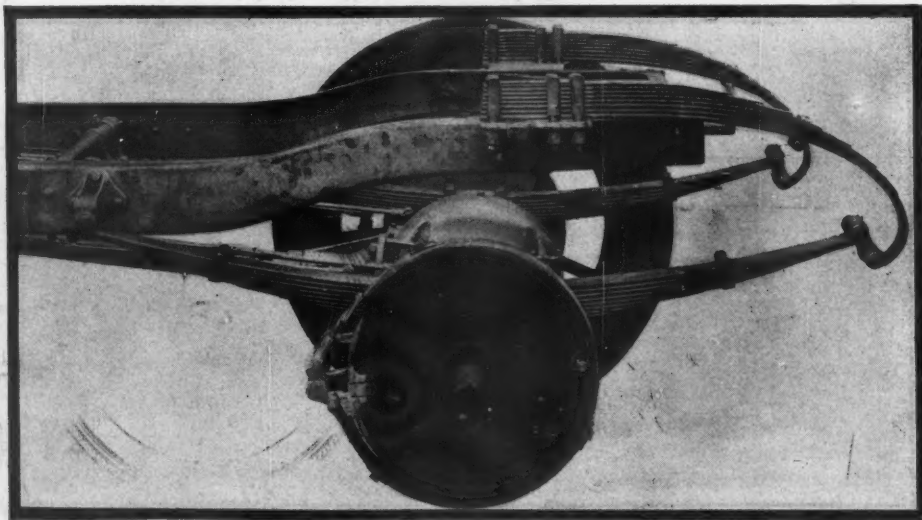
THREE-QUARTER SPRING AND DOUBLE BRAKES
